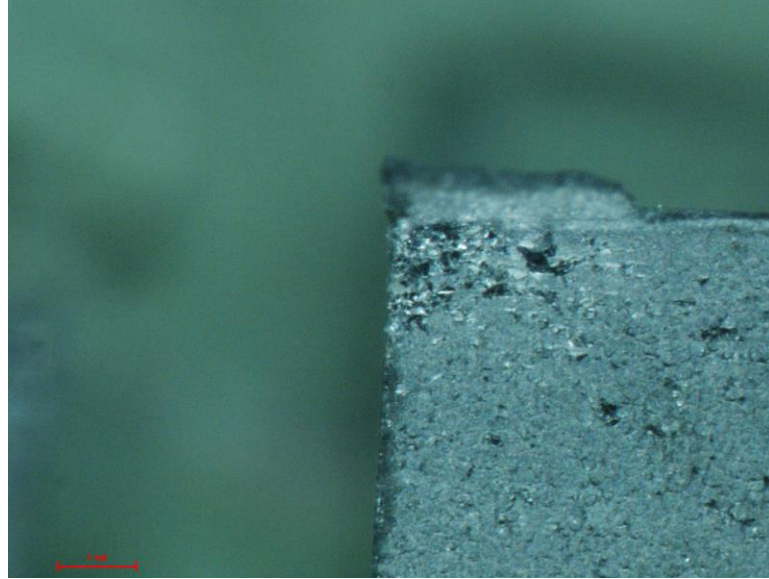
D2 Sample 4 Impact Test 50x D2 Side Bottom Corner
